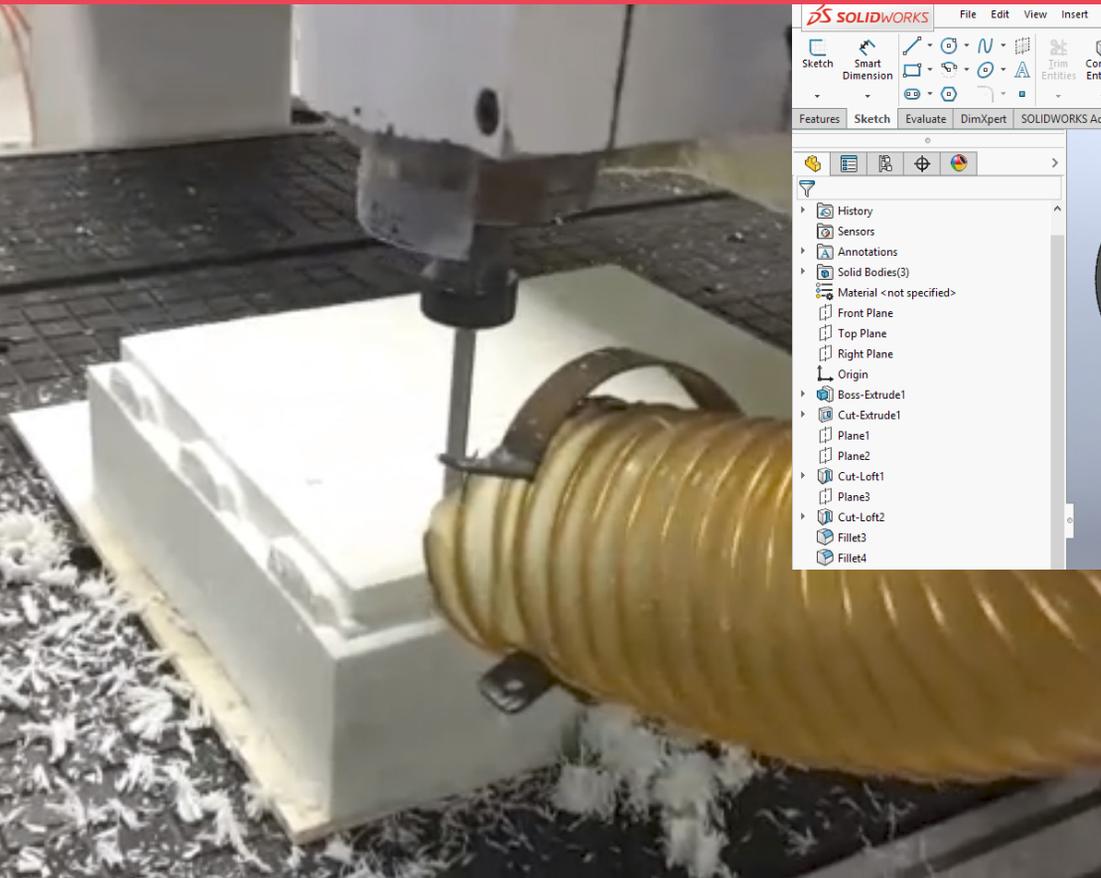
Foam milling the Oculus Go Models at the Model Making and Machine Lab (PMB) of the Faculty Industrial Design Engineering at the Delft University of Technology.
